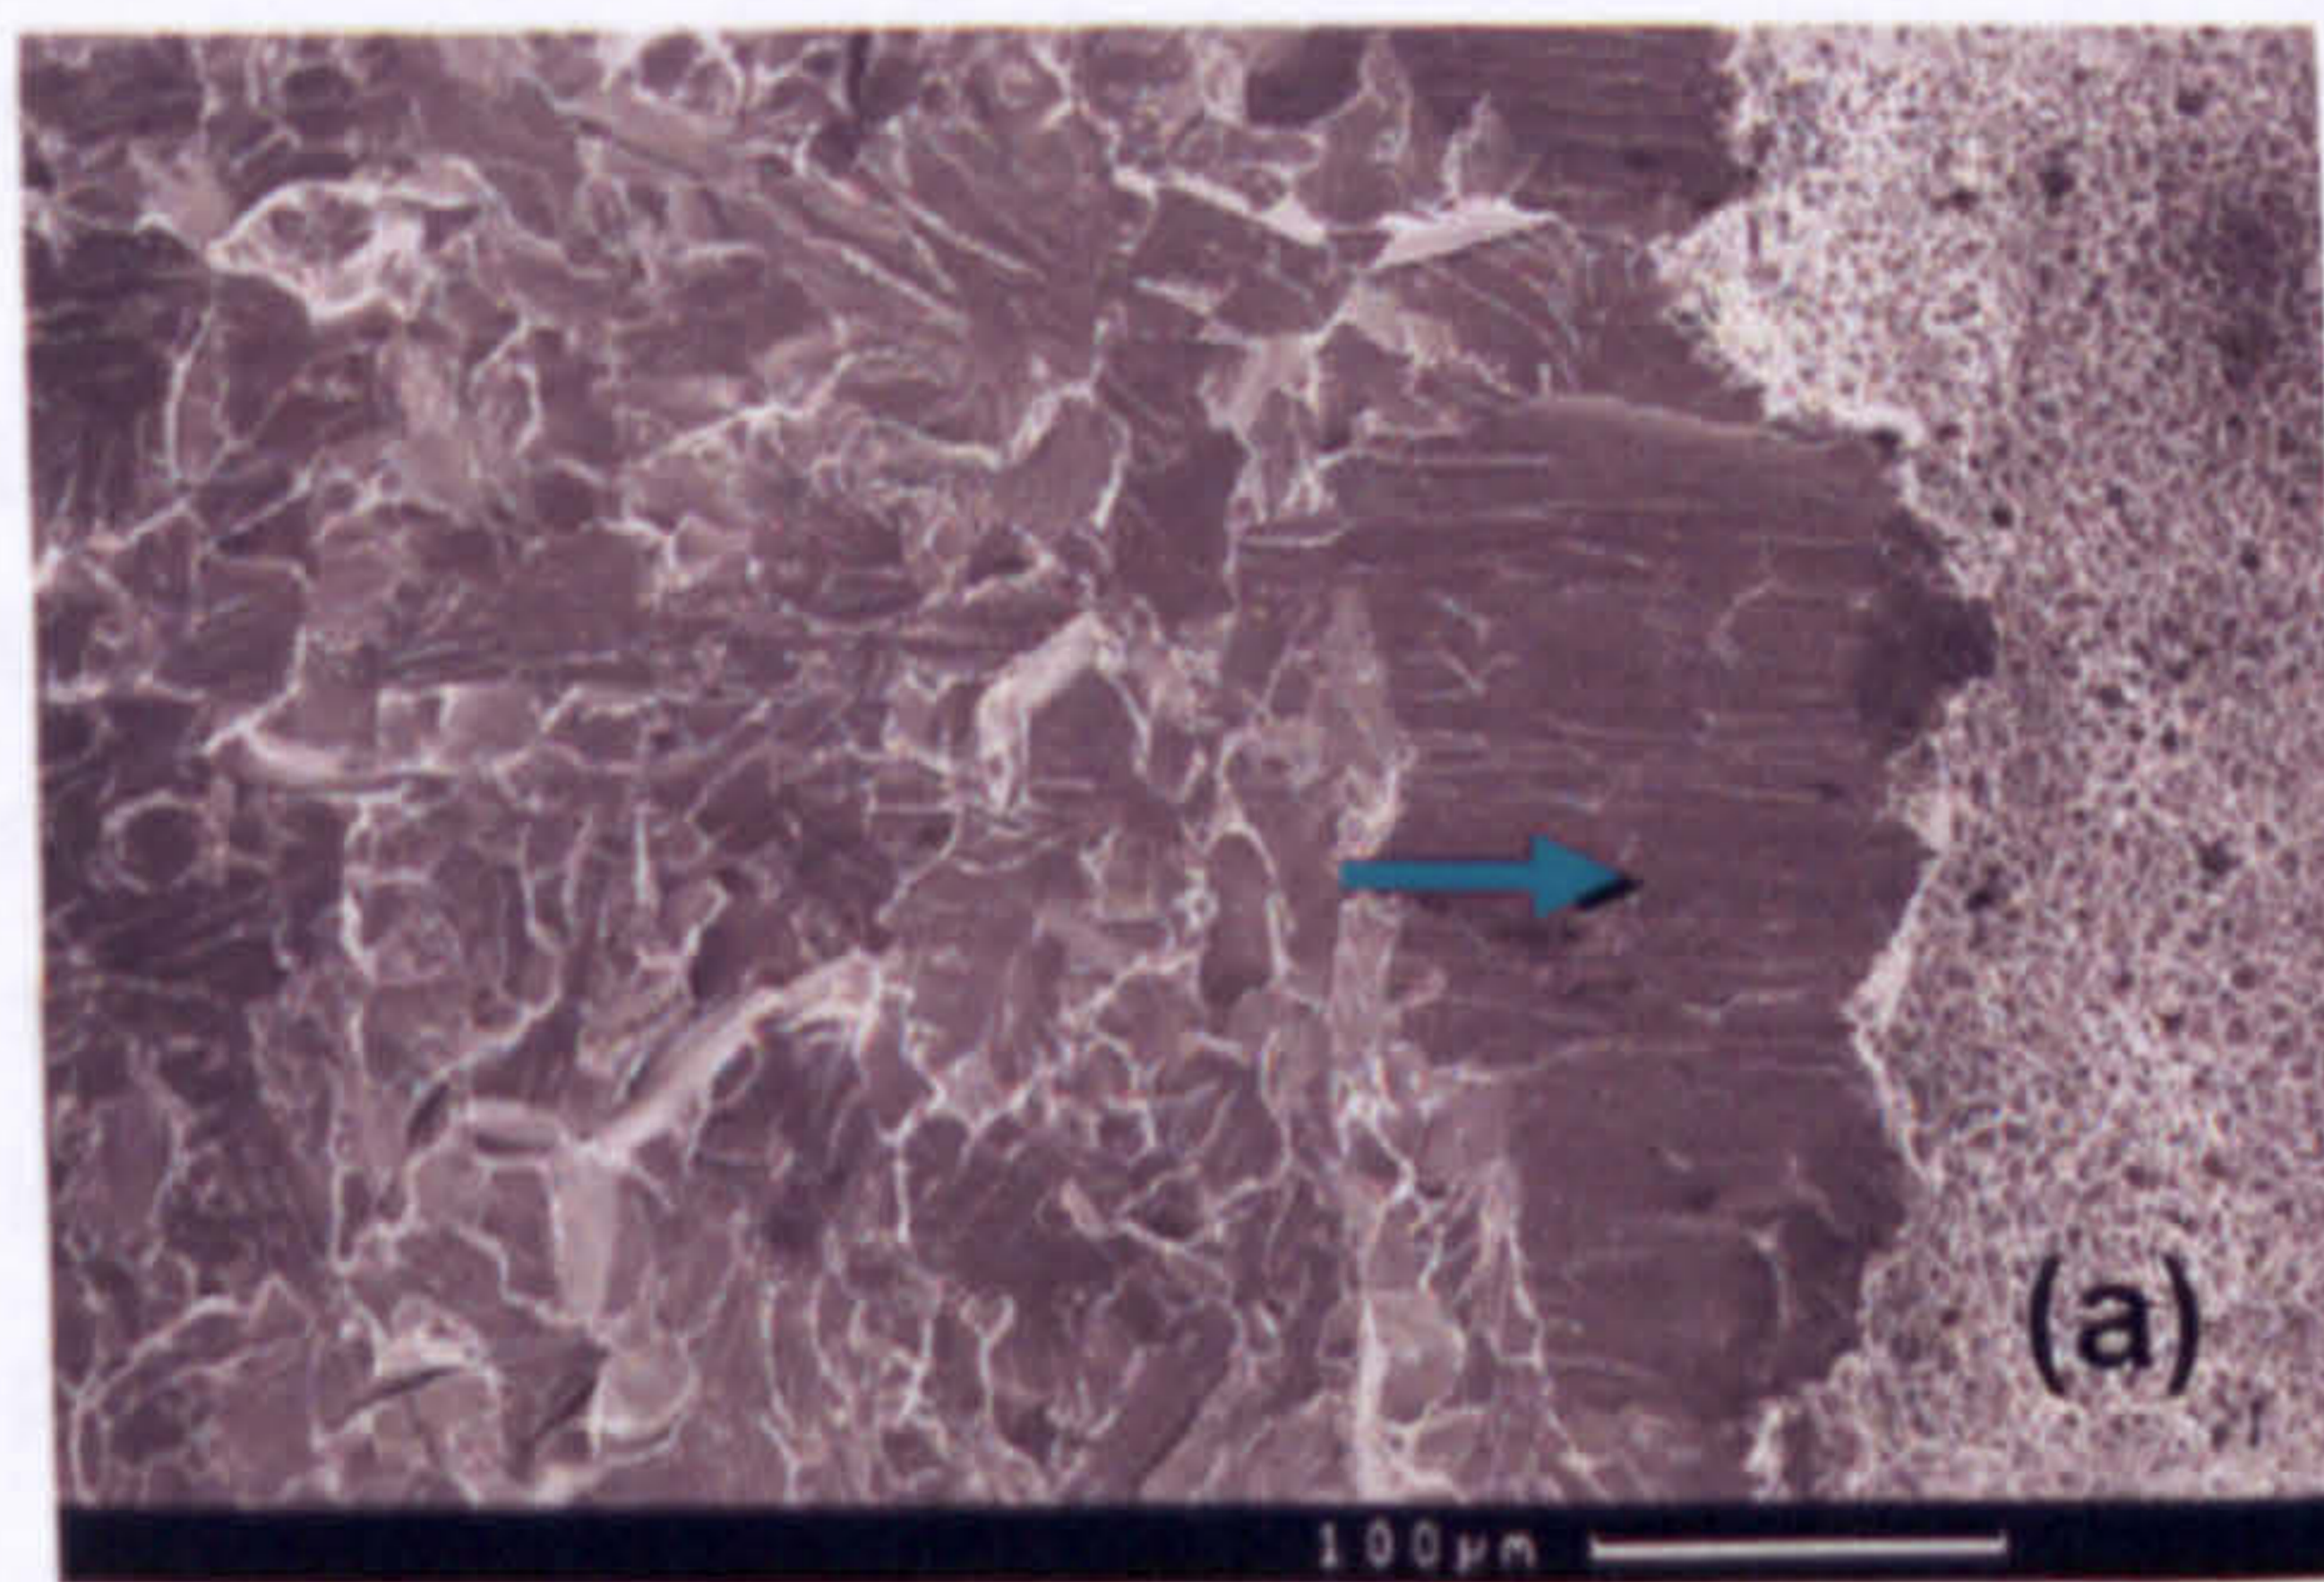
Large cleavage facets composed of several grains developed in fracture surfaces of Charpy specimens tested at room temperature.
